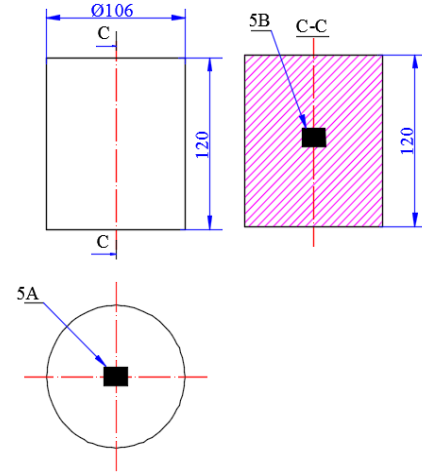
Diagram of sampling position to take photograph on input workpiece
